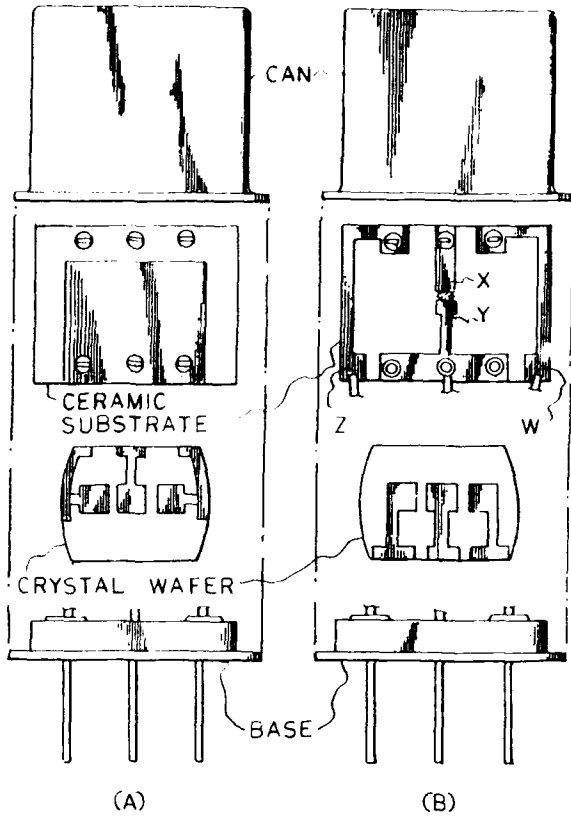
A) Exploded front view of triple resonator assembly, B) exploded rear view of triple resonator assembly.
